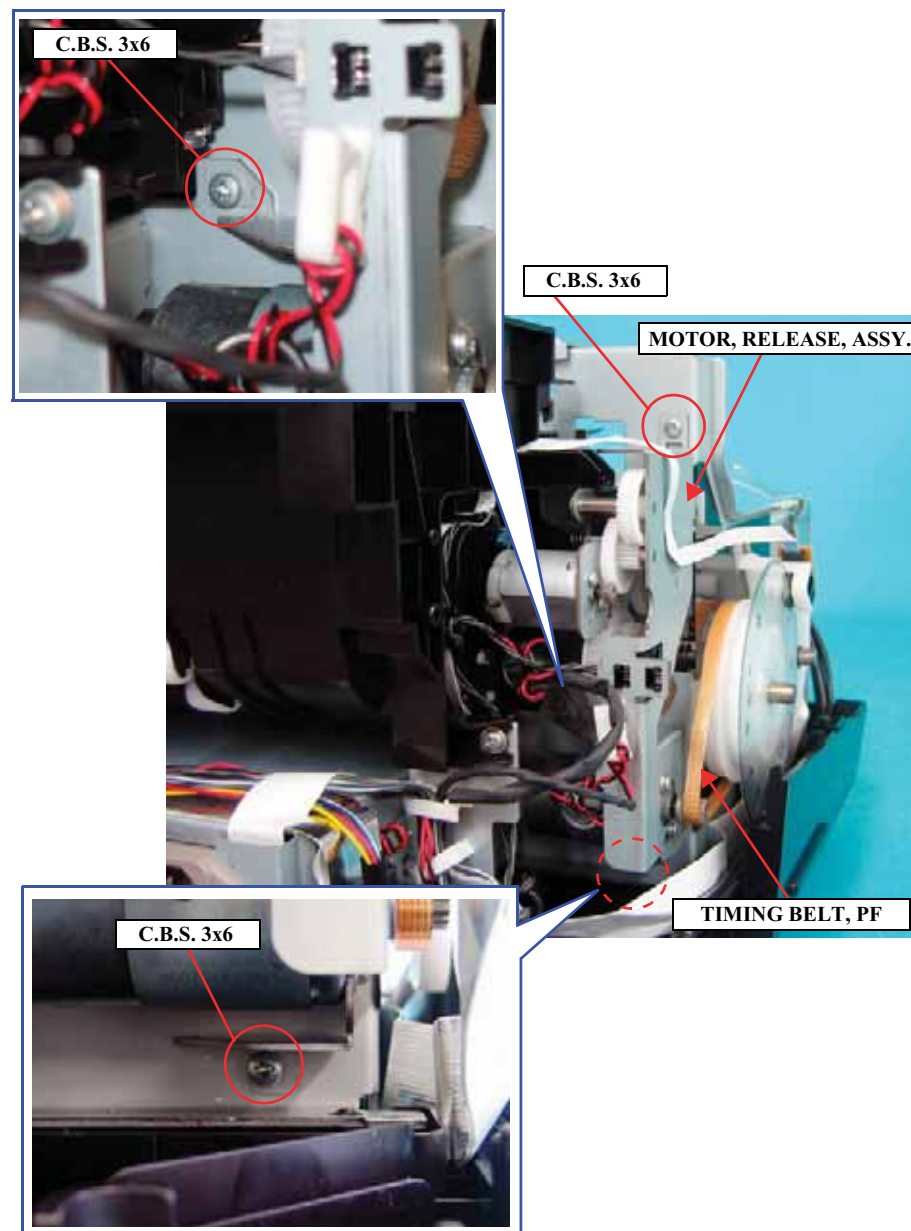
Removing the screws from the MOTOR, RELEASE ASSY.
